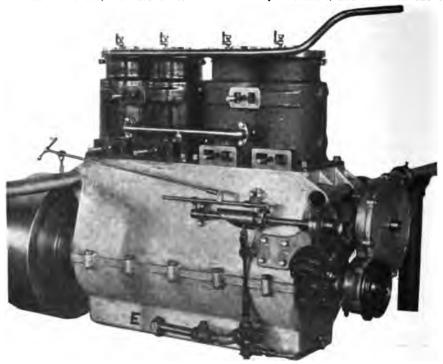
Silent Knight Motor Oiling, E, pipe to exhaust. Exhaust pressure is admitted to oil reservoir while the valge is depressed by the spiral cam, which makes one turn to 100 turns of crank shaft. The cam is hand traversed on its splined shaft, to hold the exhaust valve open as much of the time as possible, and thereby work the oiling atomizers as much of the time as may be without causing a snoky exhaust. This illustration also shows the first exhaust at the bottom of the cylinders, and the second exhaust at the top of the cylinders.
